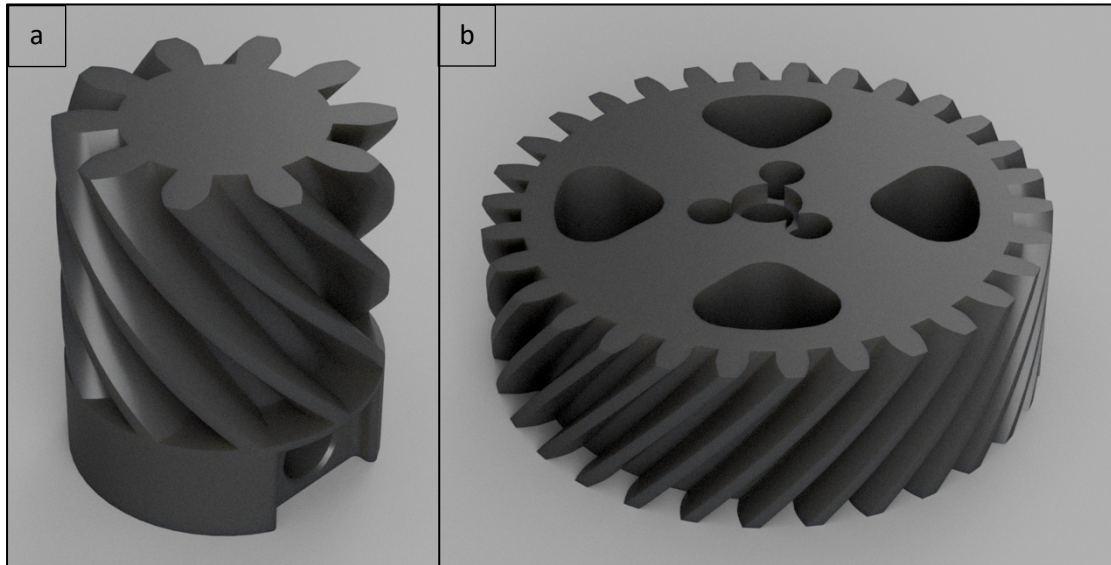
a) Drive gear - 10 teeth helical gear. b) Move gear - 30 teeth helical gear
